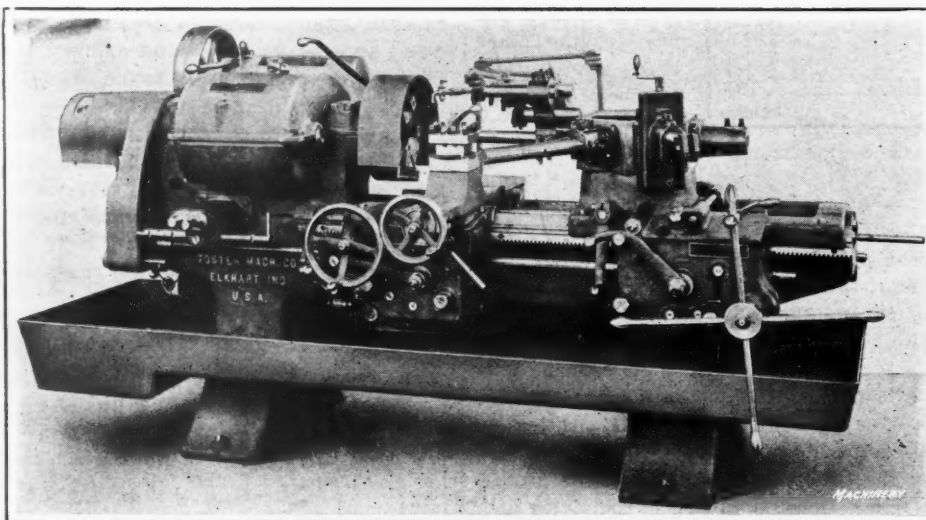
No. 2B Universal Turret Lathe built by the Foster Machine Co.
